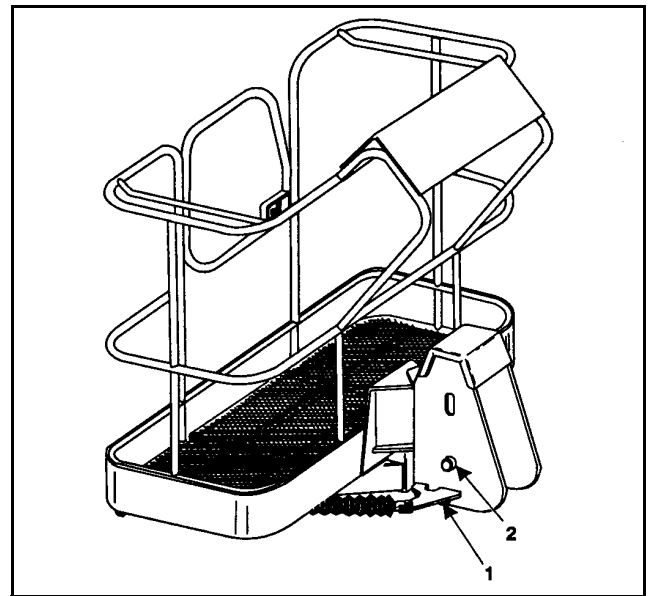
Location of Components - Platform Support. (Models 35/n35/40/n40/45)
